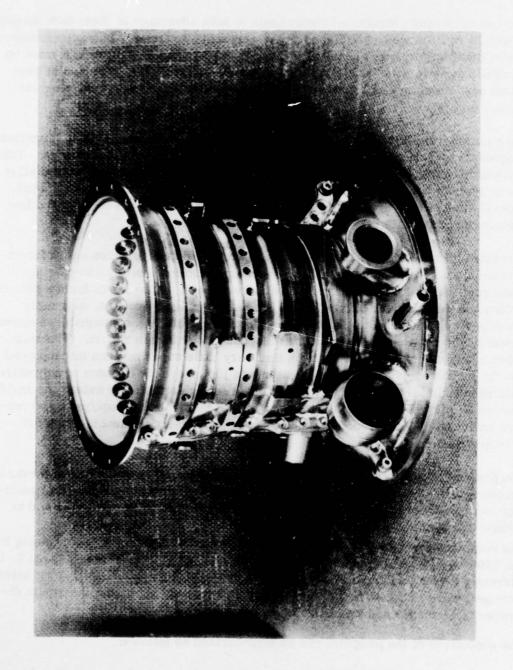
Finish Machined T700 Compressor Casing Made from Forging
